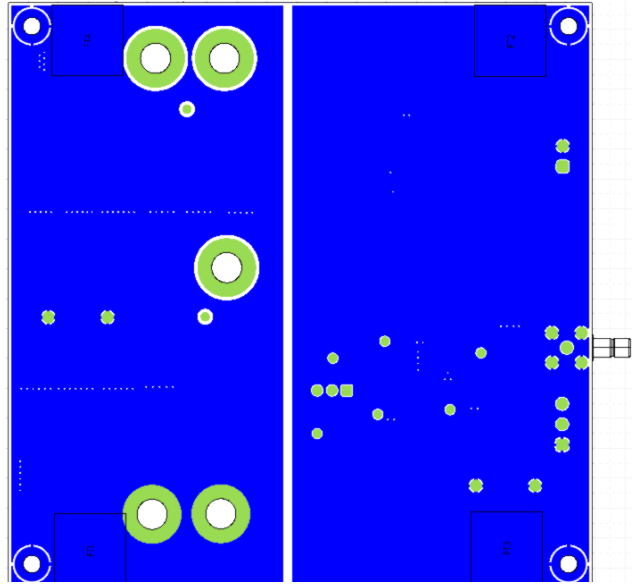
FAD1101 EVB PCB Bottom Composite Drawing (Bottom View)
